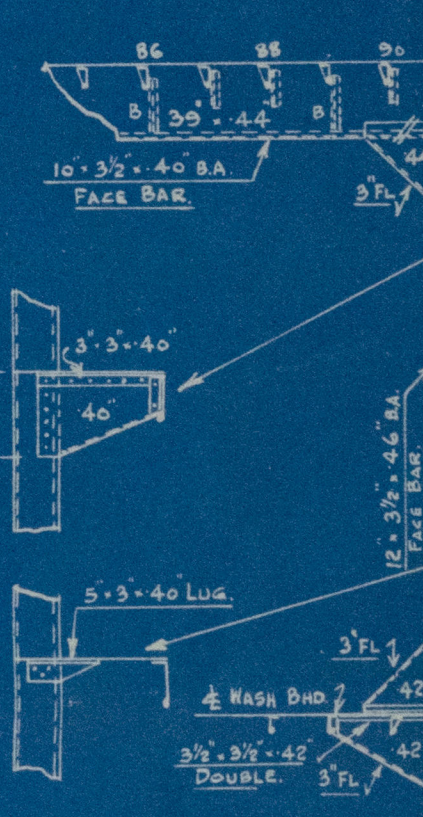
DETAIL OF HORIZONTAL GIRDER ON 92 BHD.
